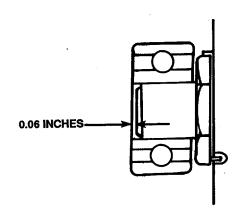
Pilot Bearing (PTO/SL-111).
